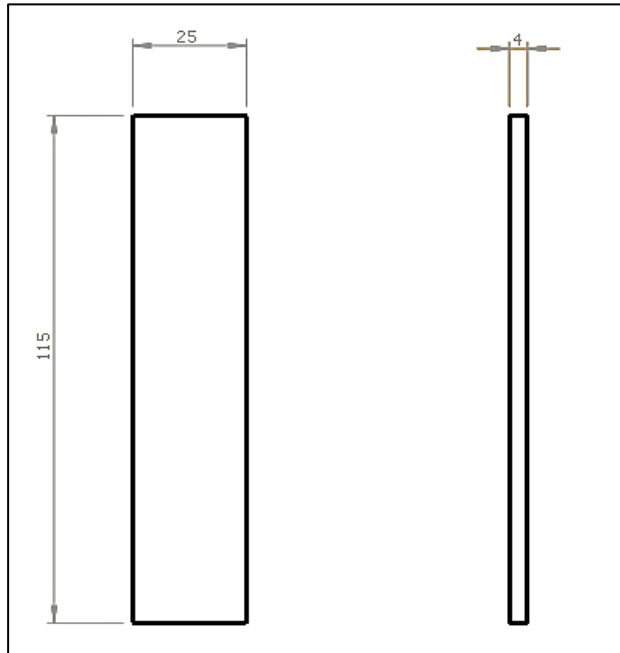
SOLIDWORKS DRAWING OF ASTM D3039 SPECIMEN
